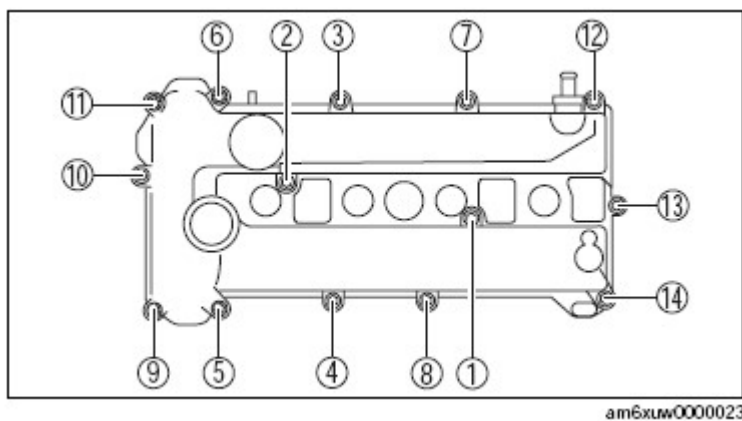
Identifying Cylinder Head Cover Bolt Tightening Order
